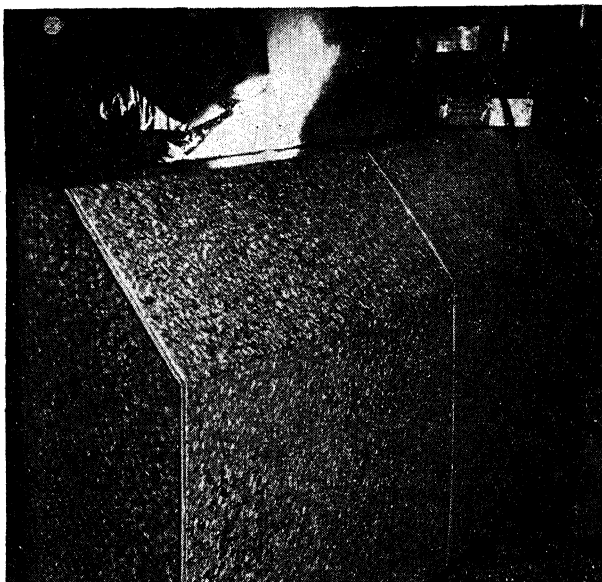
Fabricating a bakery oven unit from galvanized steel. This shop uses arc welding extensively for industrial heating equipment, baking and drying units, restaurant and kitchen equipment, show cases and ventilating piping.
